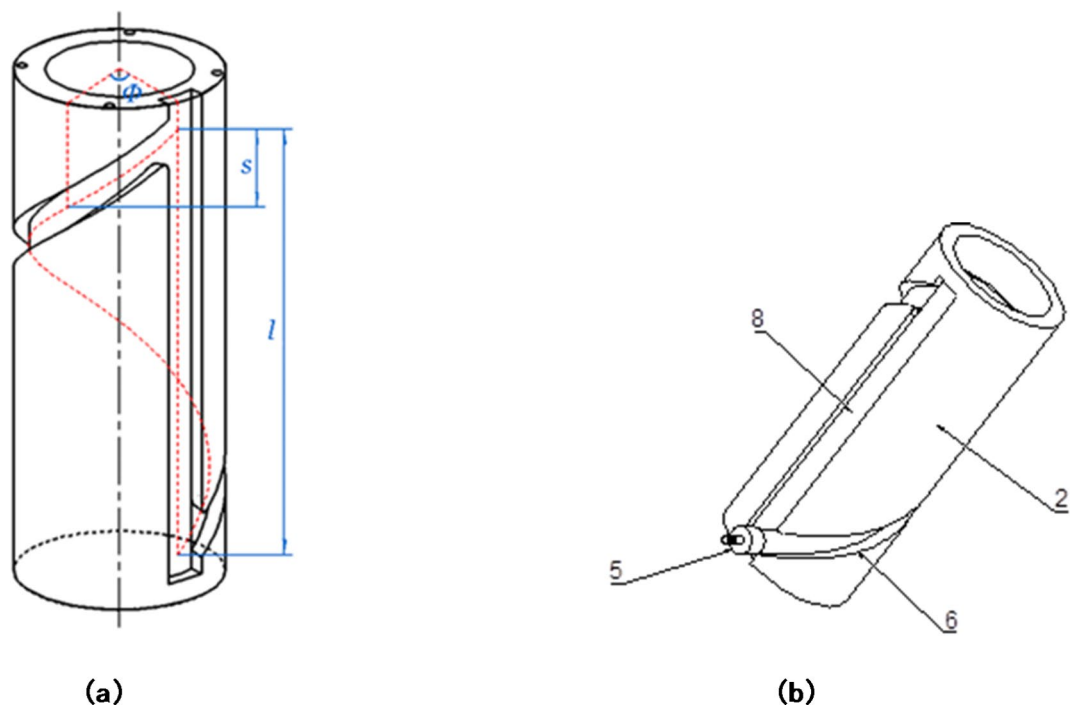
Schematic diagram of inner and outer cylinders: (a) Schematic diagram of inner cylinder track; (b) Matching Schematic diagram of inner cylinder and roller follower. 2. Inner cylinder 5. Roller follower 6. Spiral slide 8. Vertical slide.
